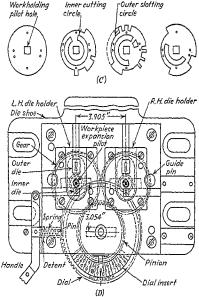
(Continued). Blank, typical finished parts, and die for punching master cams.
